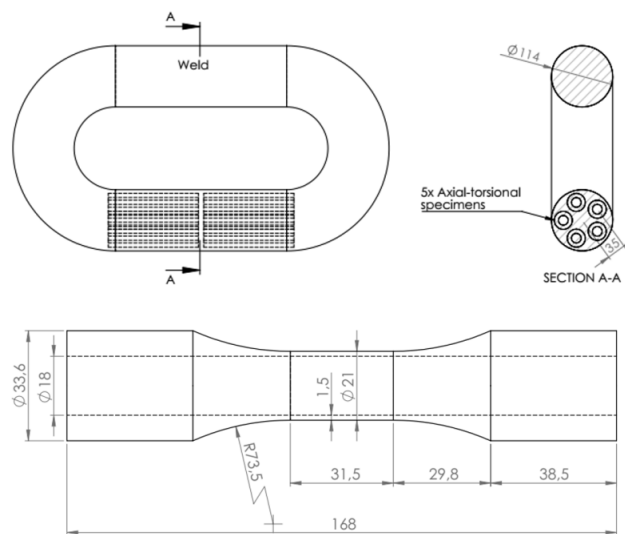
Details of the axial-torsional test specimens, dimensions in mm
